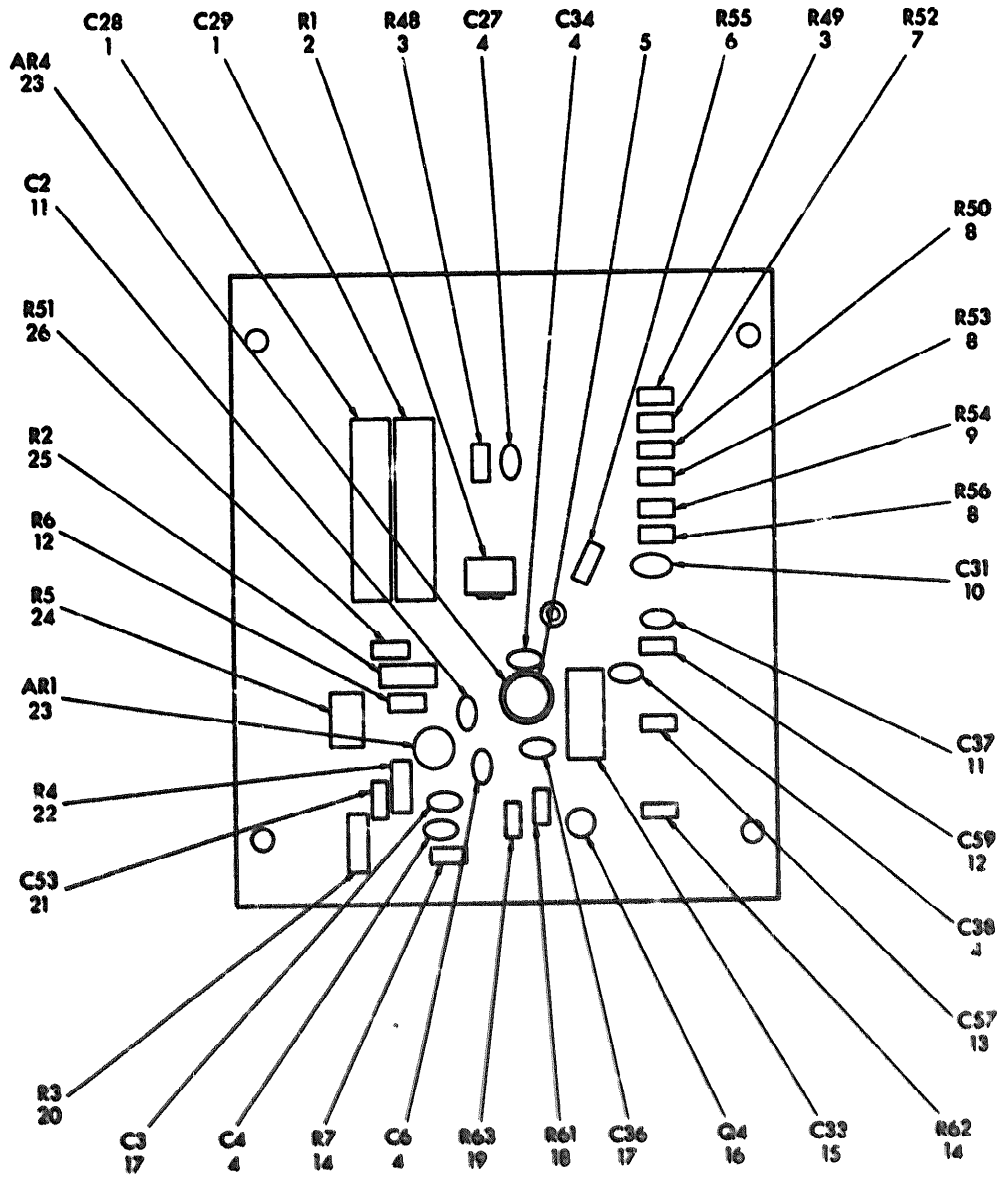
CIRCUIT CARD ASSEMBLY A1A1
